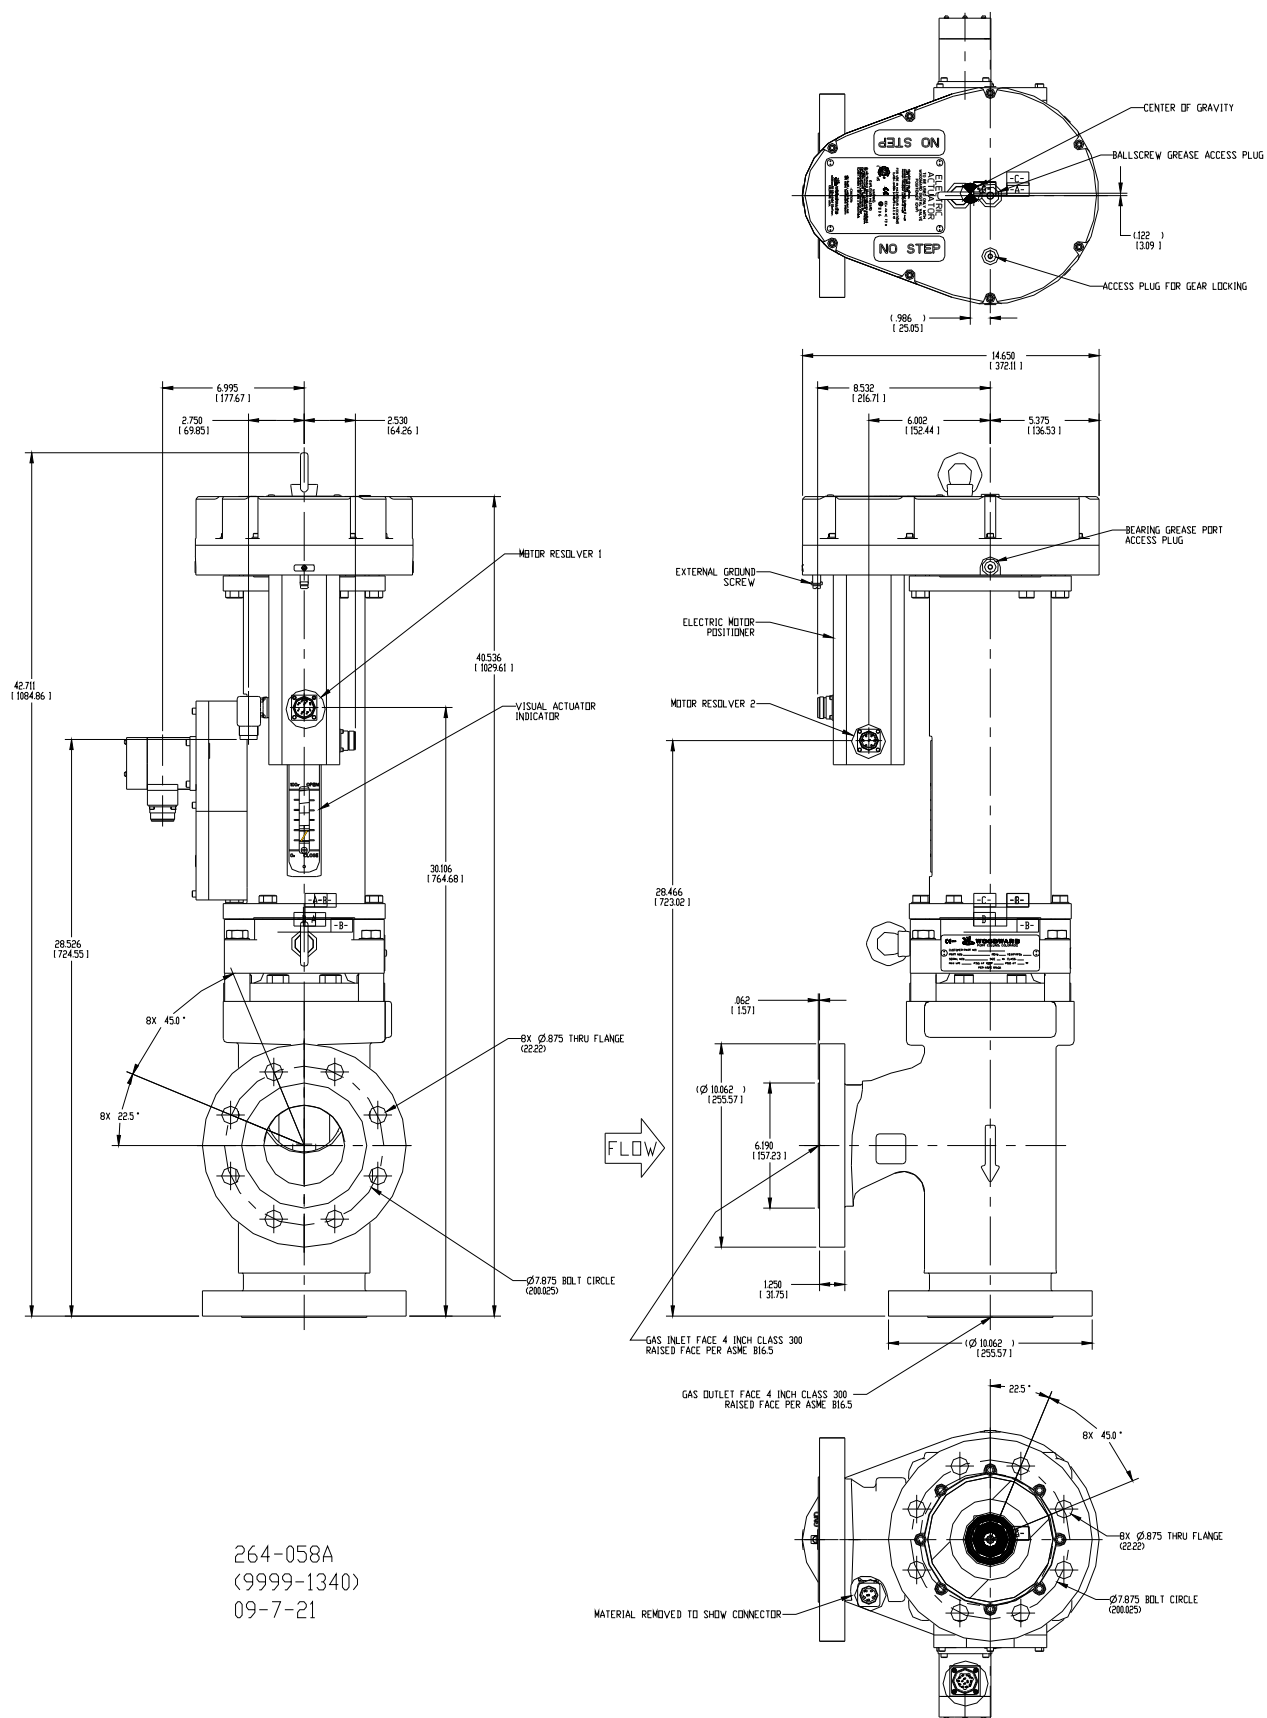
Outline Drawing 4" LESV (Left View)
